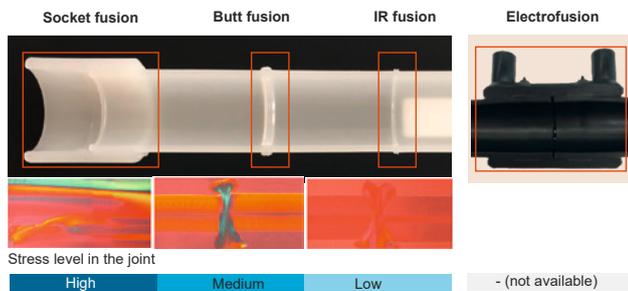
Weld bead in different polymer fusion technologies.
